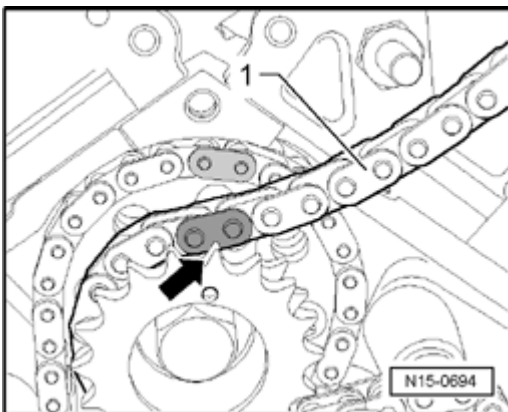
Installing Roller Chain With First Copper Chain Element Onto Intermediate Shaft So That Both Copper Elements Align
